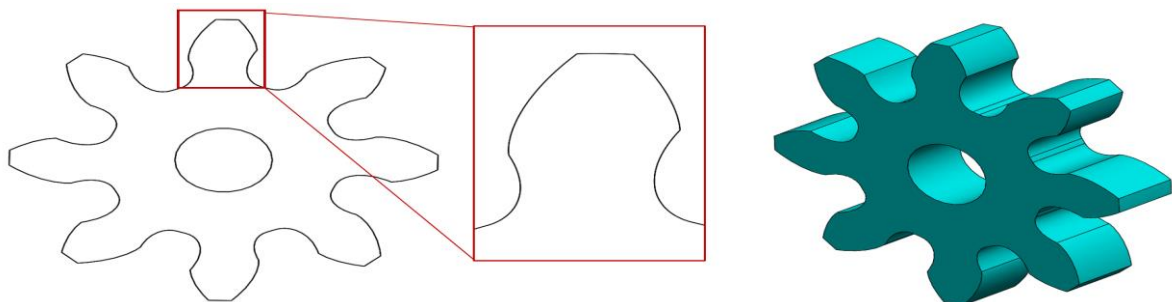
The 2D tooth profile and 3D Model for the asymmetric pressure angle and fillets gear case.
